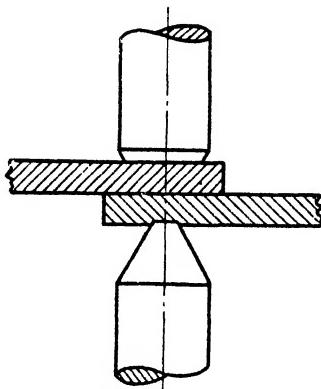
FLAT ELECTRODE FOR INVISIBLE SPOT WELD
